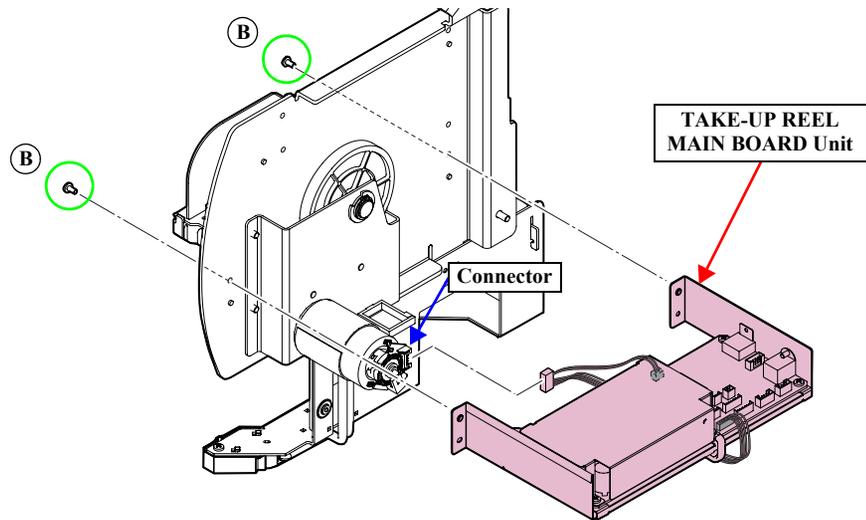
Removing the TAKE-UP REEL MAIN BOARD Unit
